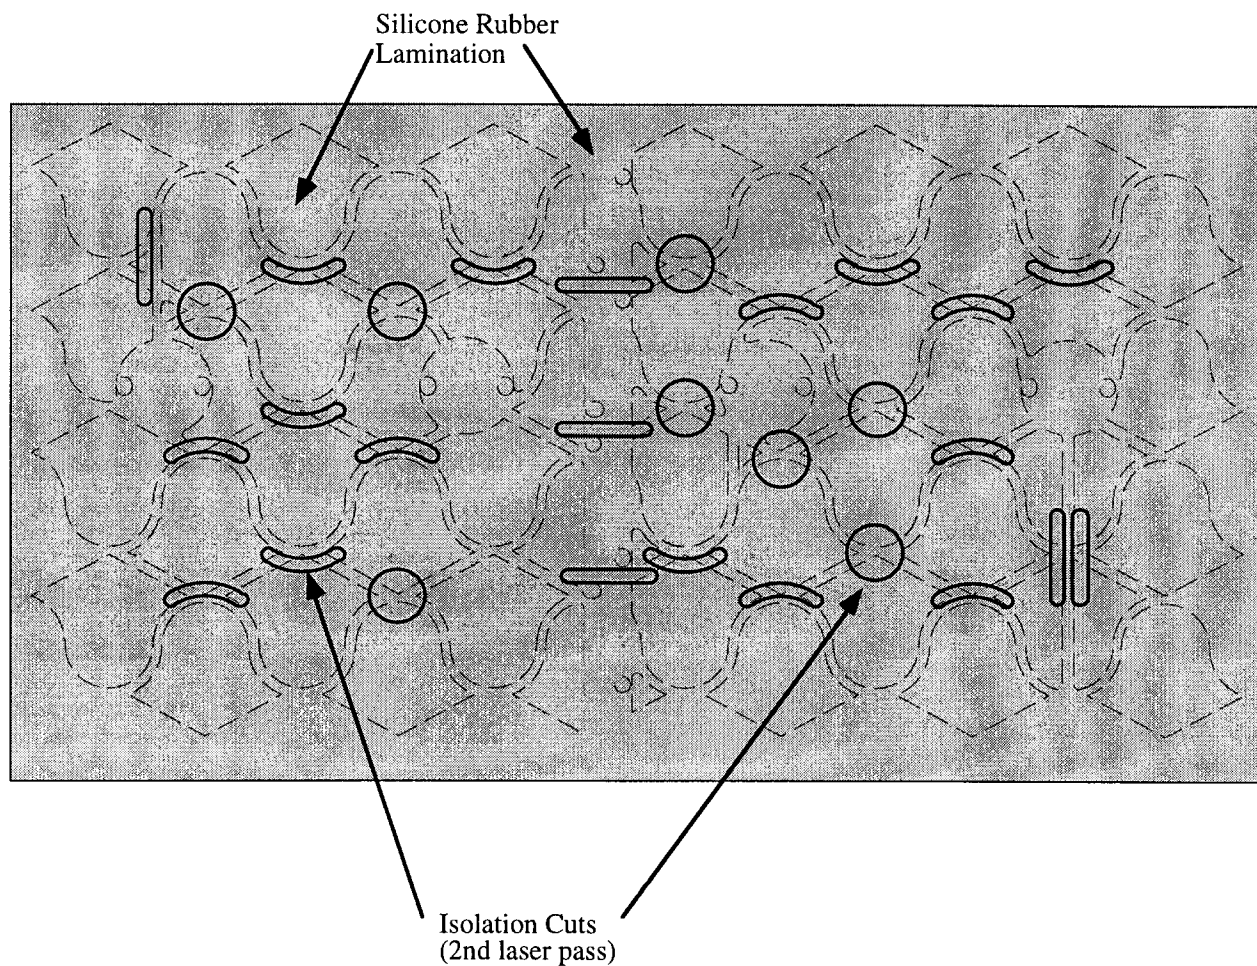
Schematic of the revised FWF electrode design that will be implemented using laser machining techniques. In this design, the central core, the electrode contacts, and the sinusoidal tracings are machined from a single piece of platinum foil. In the original design scheme, these elements would have been 3 separate pieces requiring welded connections.
